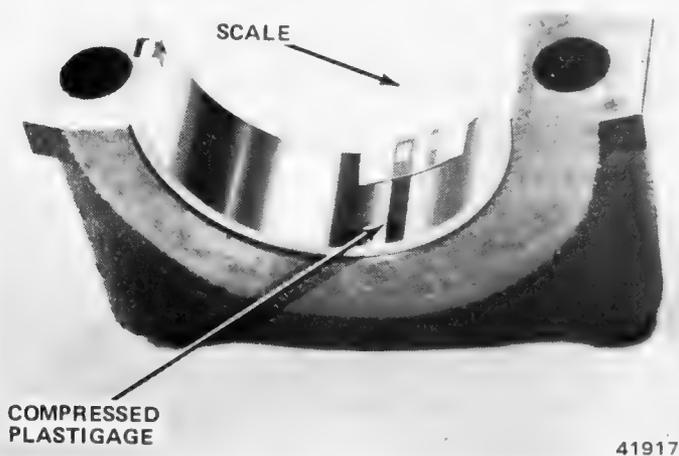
B-172 Checking Main Bearing Clearance with Plastigage
